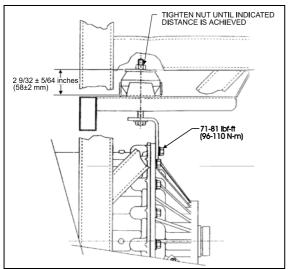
RUBBER DAMPER TOLERANCE
